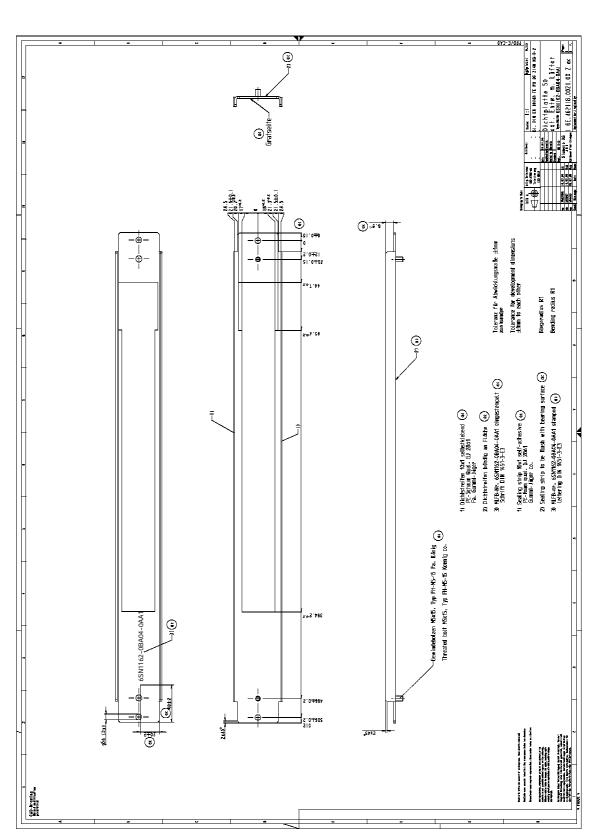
External cooling, mounting frame for cabinet installation module width 50 mm, 6SN1162-0BA04-0AA1
